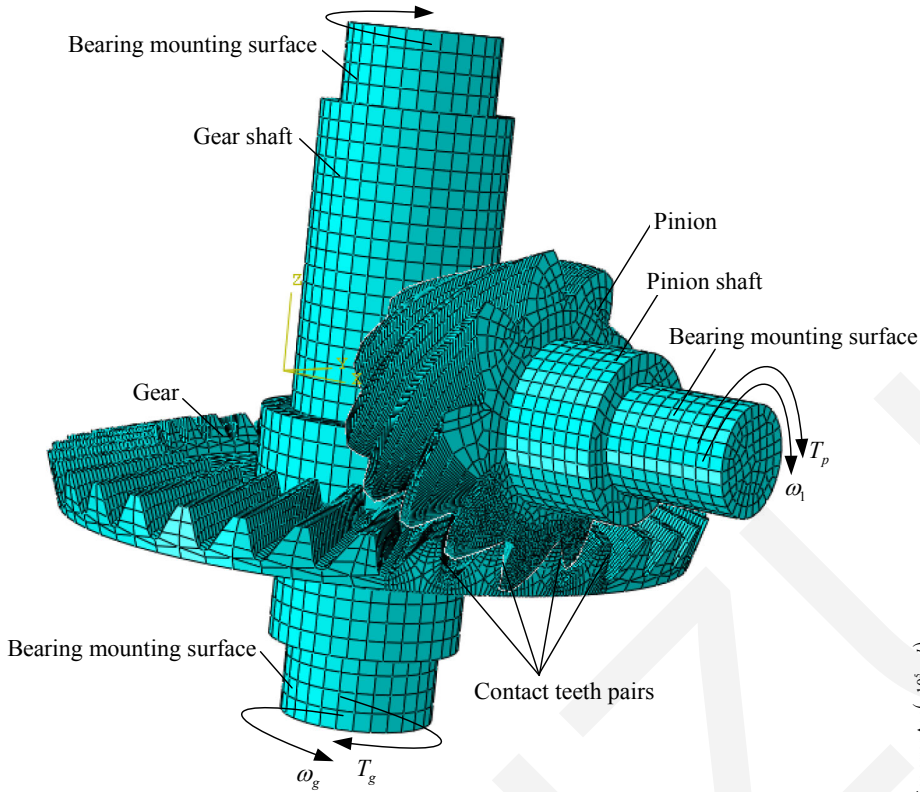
Finite element model of the simplified hypoid gear drive system.
